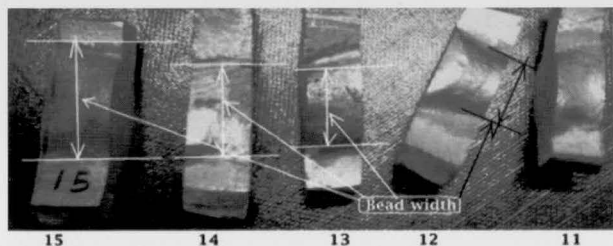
Bead width at welding speed of 110 mm/min.
